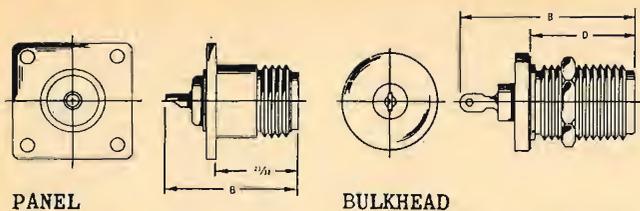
Typical receptacle configuration. Dimension B is receptacle length; Dimension D projects through panel.
